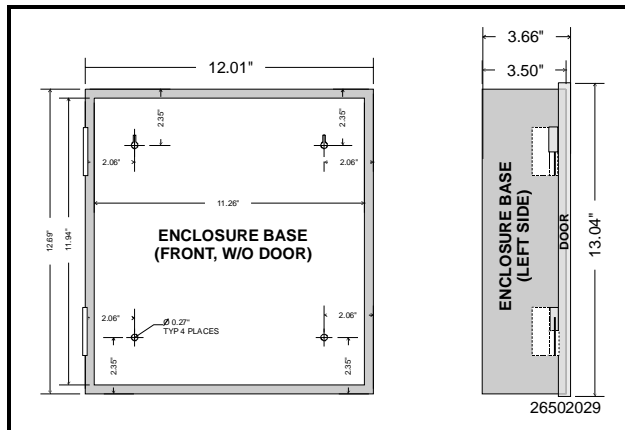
Einstein Hinged Box Mounting Dimensions
